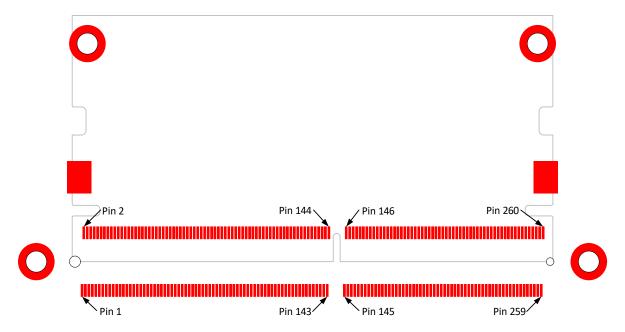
Pin numbering schema on the module connector land pattern (top view)
